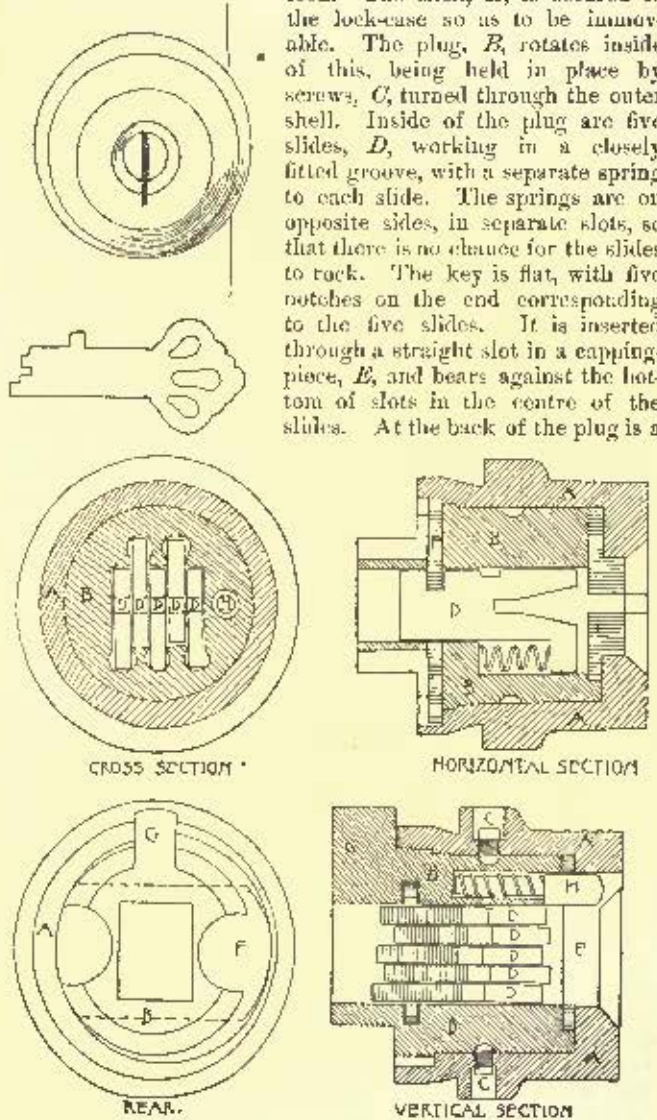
Cylinder Lock. Hopkins & Dickinson Mfg. Co.
